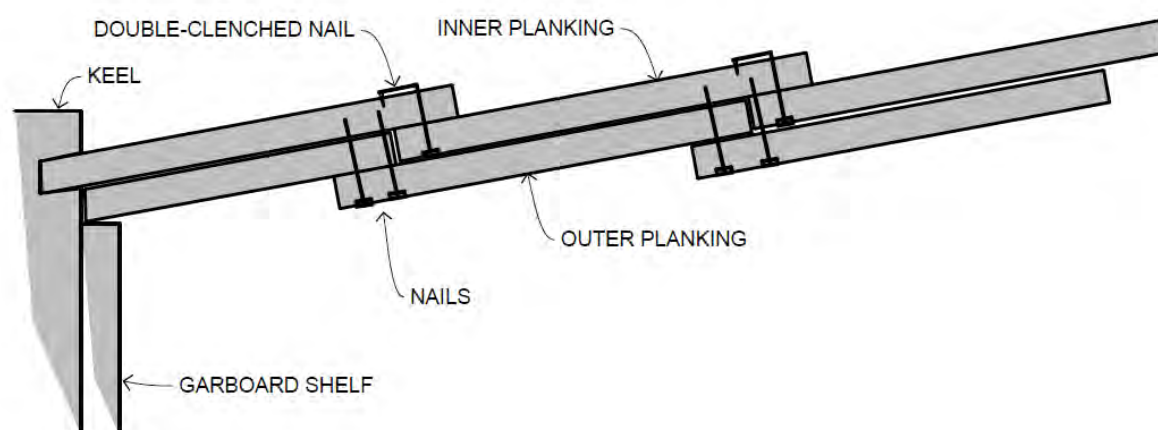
Cross section diagram of inner and outer layer planking. (Source: Benjamin Wharton 2021).
